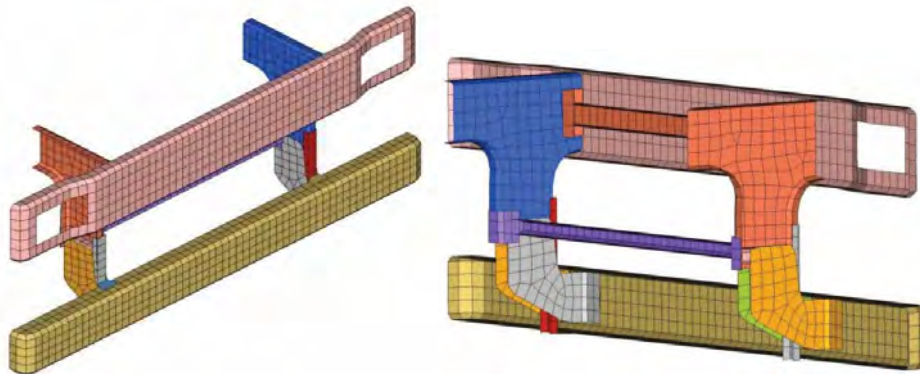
The Finite Element Model of the Front Underrun Protection barrier
